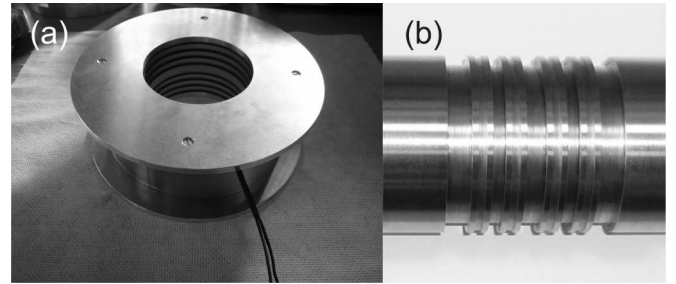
Picture of the (a) implemented TLA before casting and (b) rotor.
